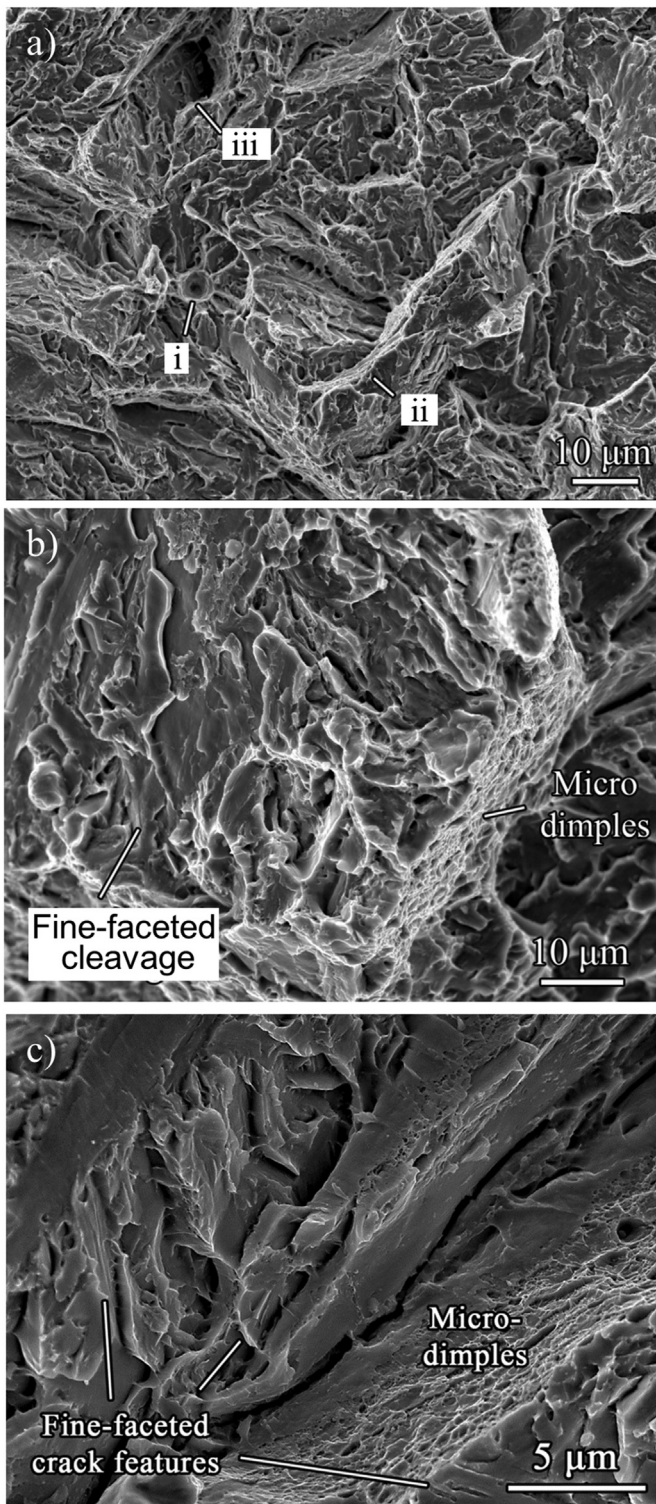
Fractography of tensile tested QP500 specimen. (a) General overview: i) dimple, ii) ductile character region, iii) deep crack. (b) Detail of transgranular faceted fracture. (c) Detail of a deep crack.
